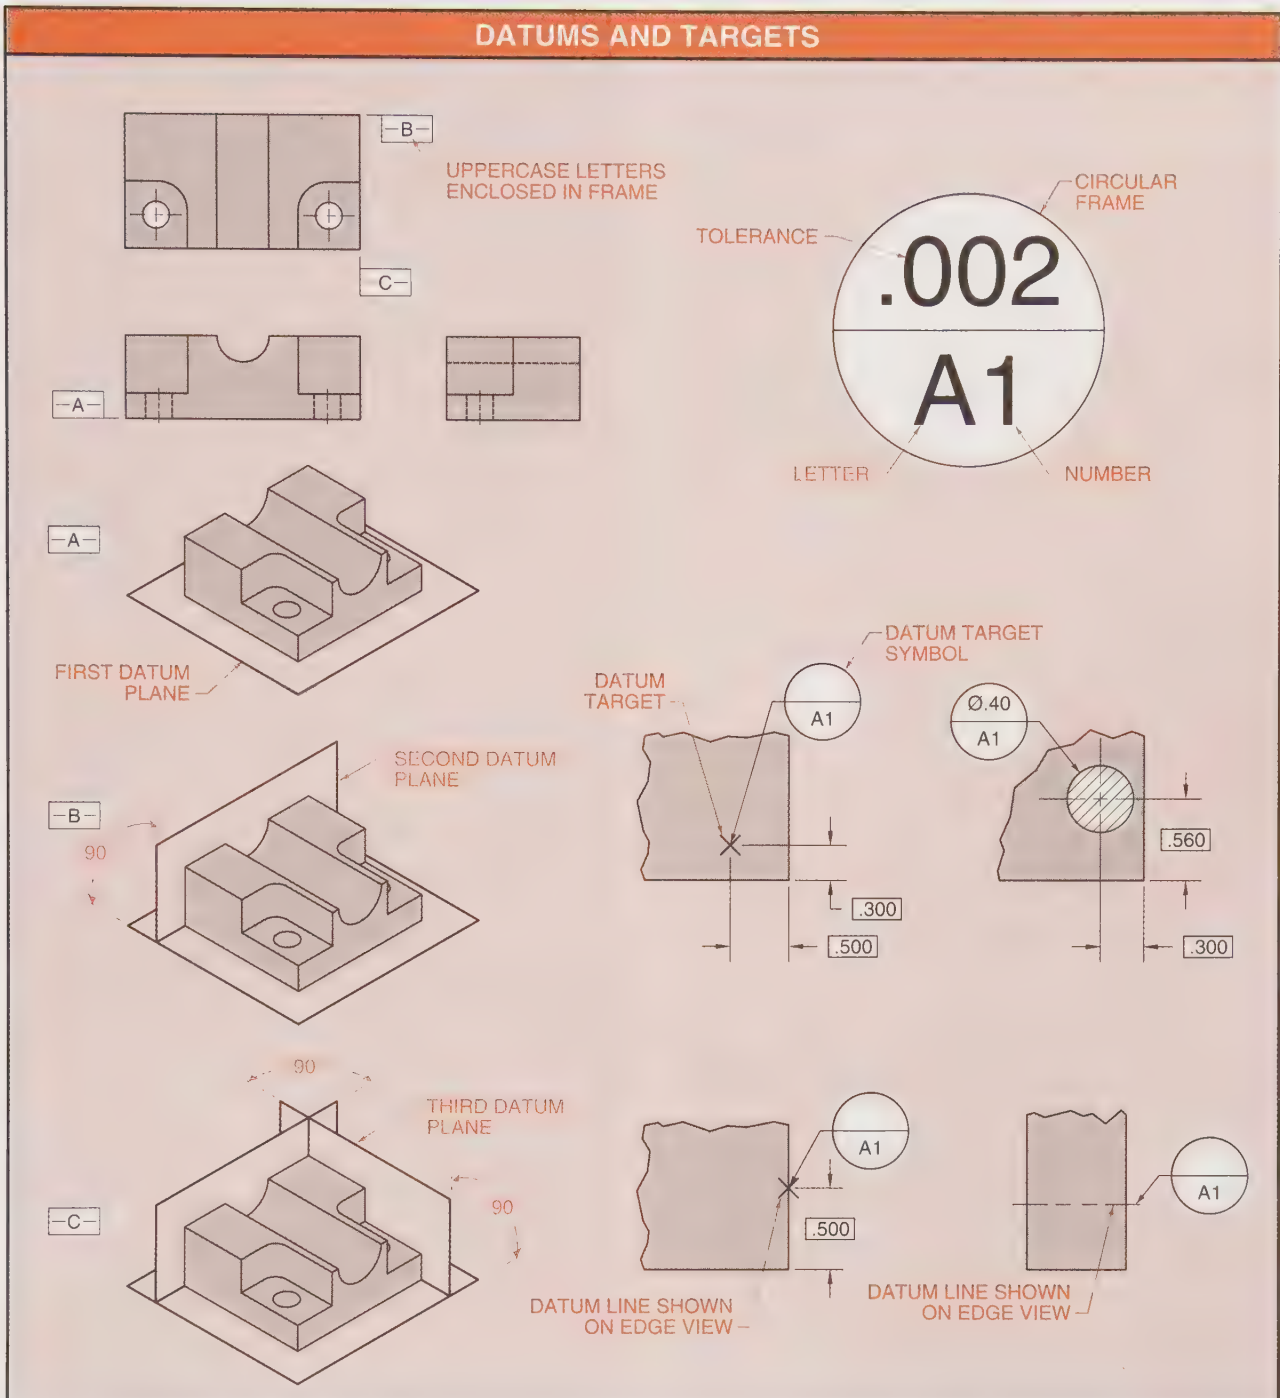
Datums and targets are used to specify origins for dimensions.
